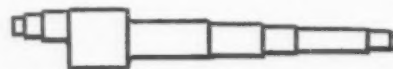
Standard punching press crankshaft, with main frame bearing extra large
